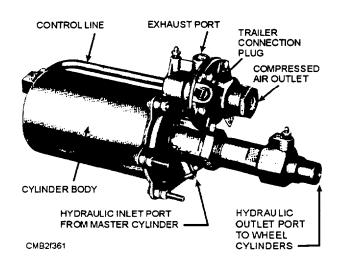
Air-hydraulic power cylinder assembly (Air-Pak).
